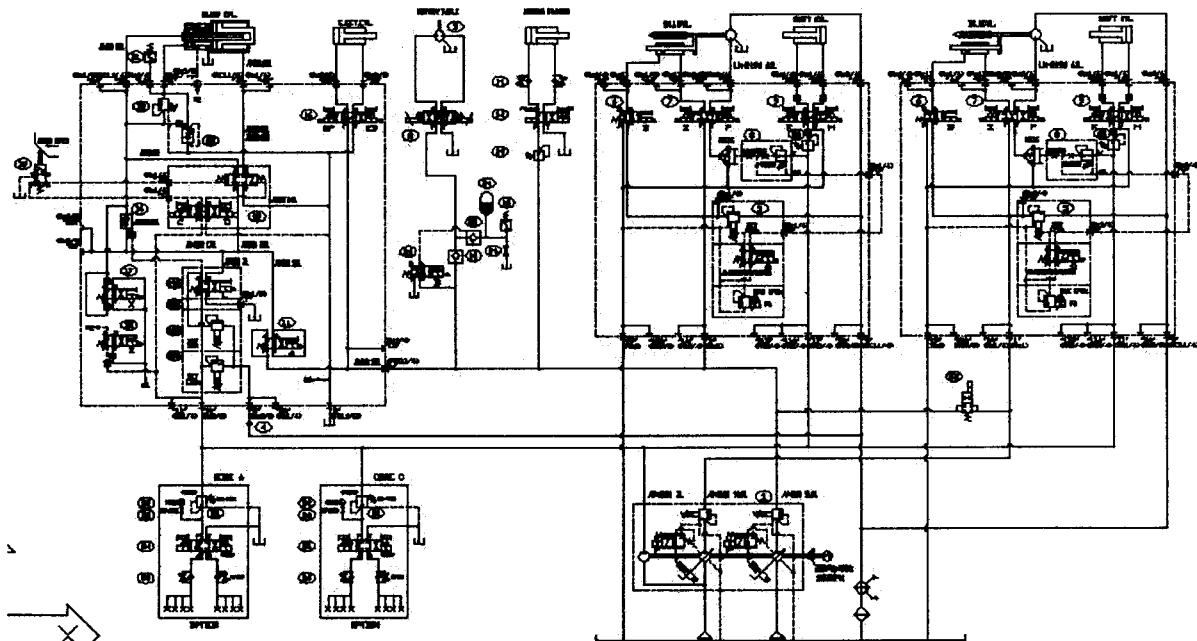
Hydraulic circuit of injection molding machine which is simulated
